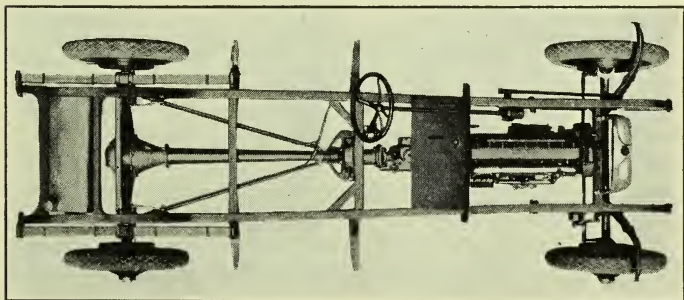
PLAN VIEW OF THE DUESENBERG CAR IN WHICH THE INTERNAL BRAKES ACT ON ALL FOUR WHEELS AND ARE ACTUATED HYDRAULICALLY
